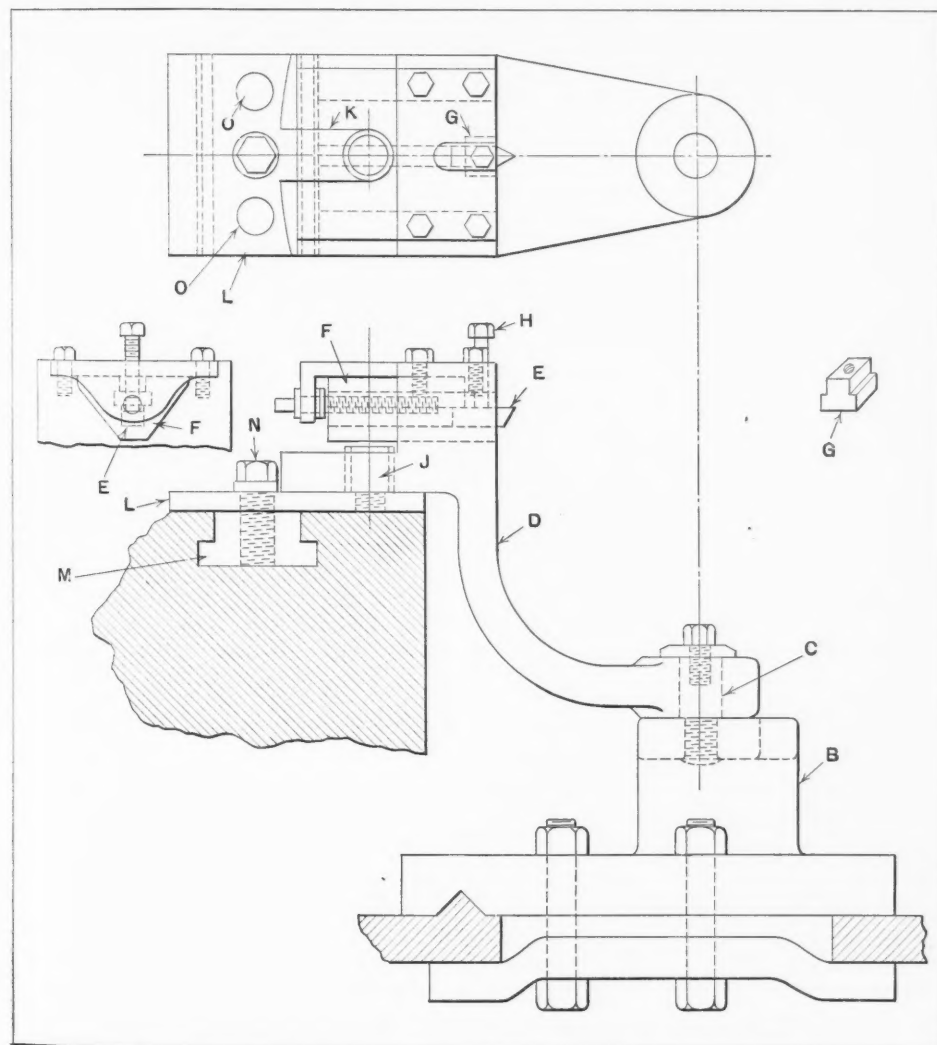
Assembly Views of Fixture Shown in Fig. 1
